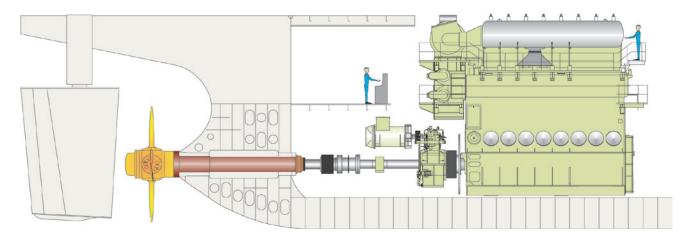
Two-stoke propulsion package (8S50MC-C engine, tunnel gear, VBS1680 propeller)
